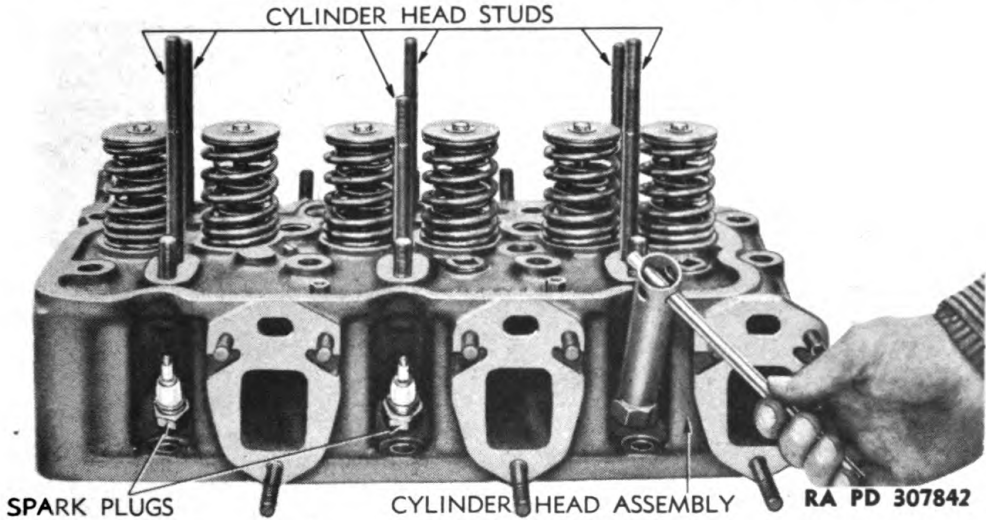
Removing Spark Plug From Cylinder Head, Using Wrench 41-W-3328
